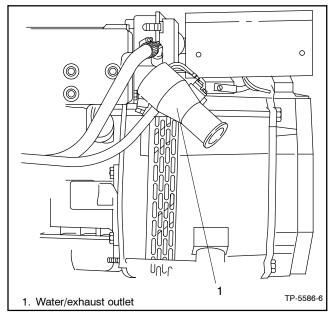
Mixer Elbow/Exhaust Connection, Typical
